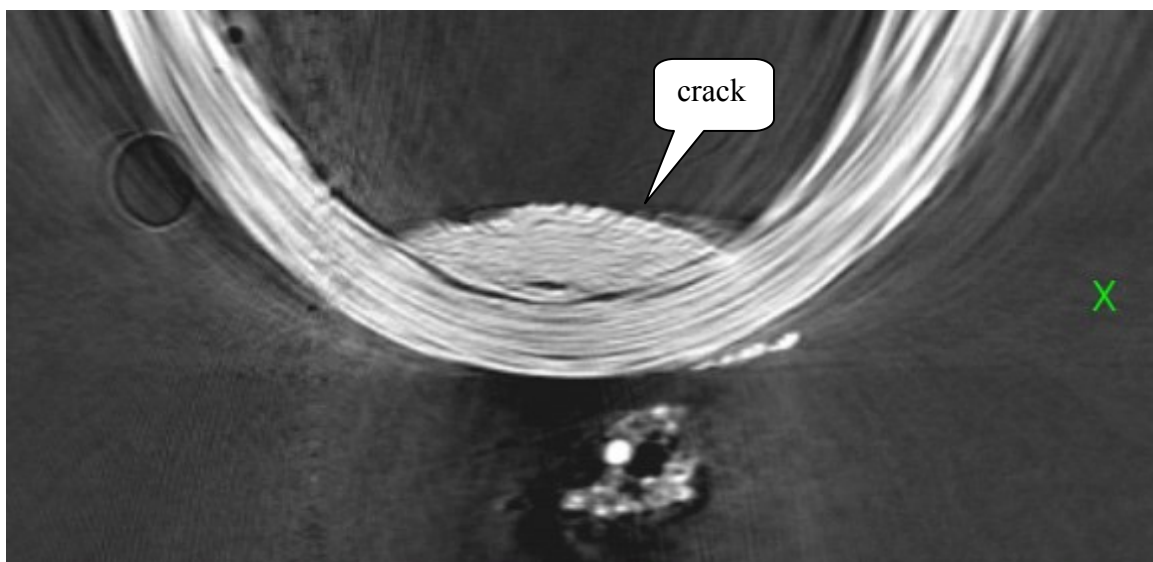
Vertical slice of tomography reconstruction of specimen under load showing crack within the specimen not observable prior to loading.
